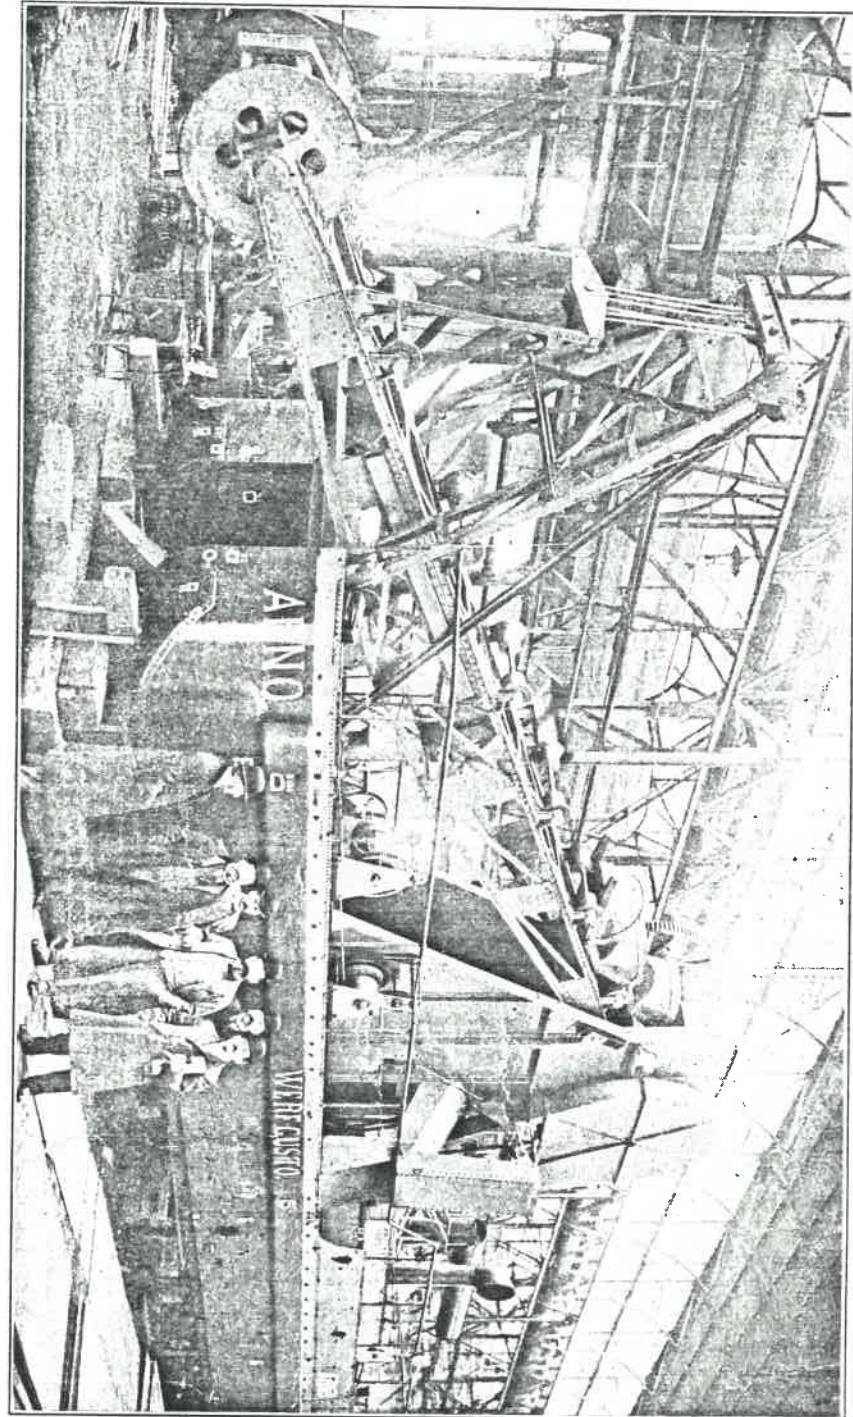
Interior view of shipbuilding hall, Smulders Works.
